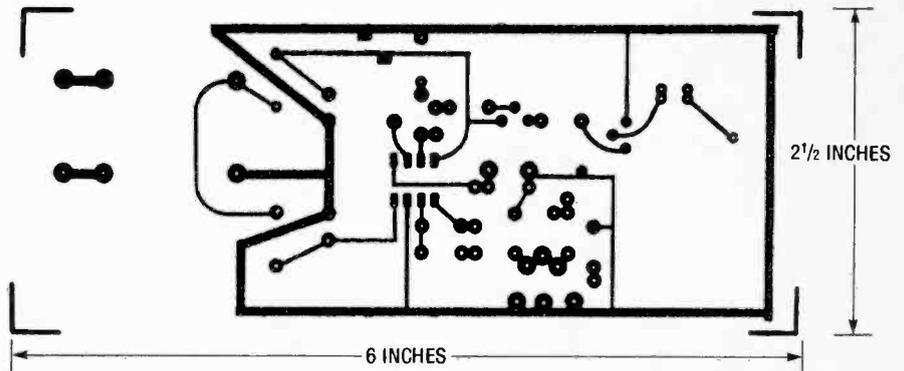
While there is nothing critical about the layout of the circuit-board components to prevent you from devising your own design, using the printed-circuit foil pattern shown here will certainly make things go a bit easier.
